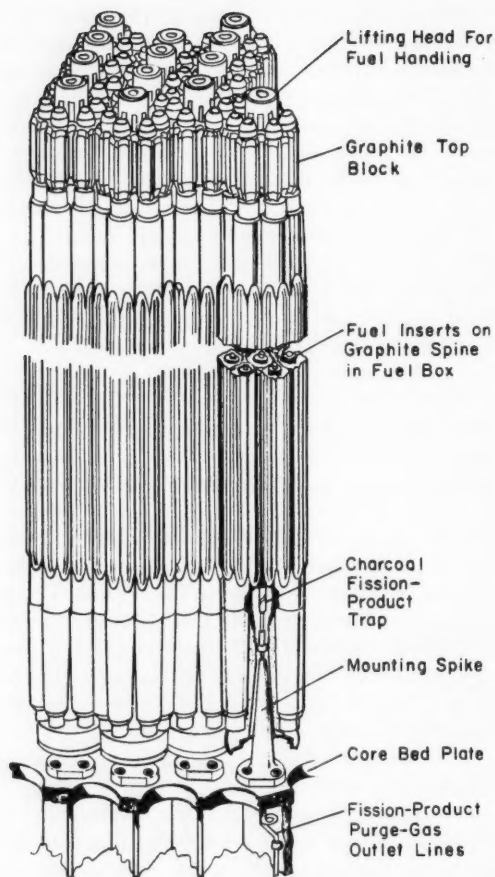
Assembly of fuel elements to form the Dragon-reactor core. (Adapted from Ref. 4).
